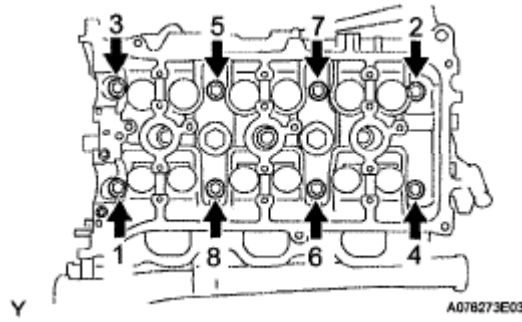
Identifying Bearing Cap Bolts Loosen Sequence (Bank 1 4WD And Pre-Runner)
